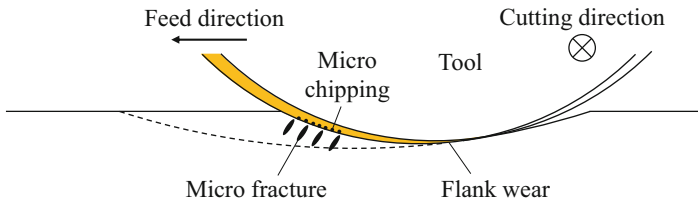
Schematic diagram for two kinds of tool wear patterns in dimple cutting
